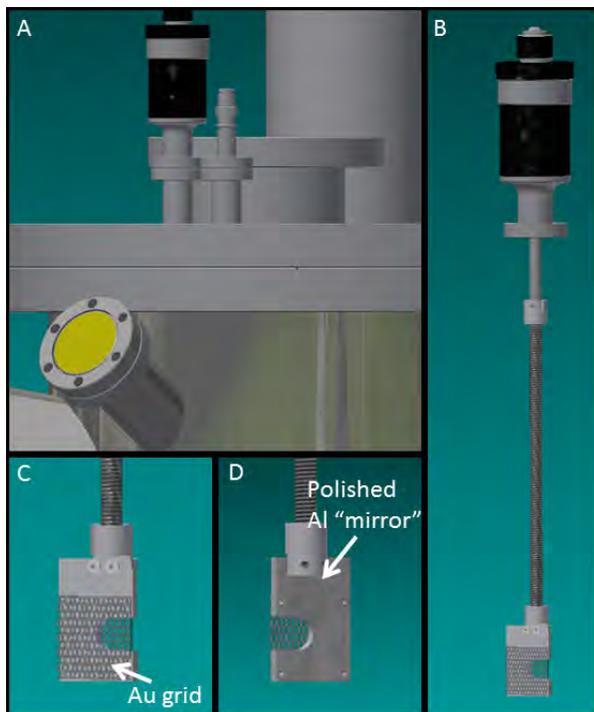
Sample view mirror assembly external view (A), complete view (B), upstream zoom (C) and downstream zoom (D).
